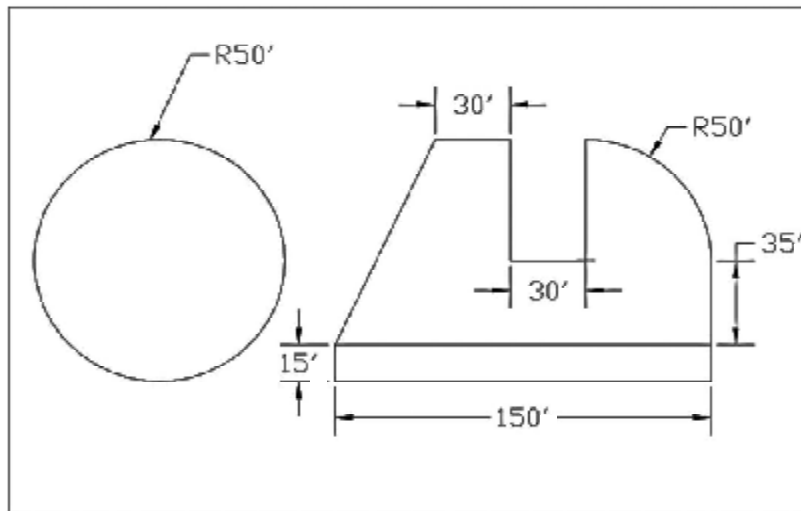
Planned tool path for the cutting test all dimensions in (mm).
